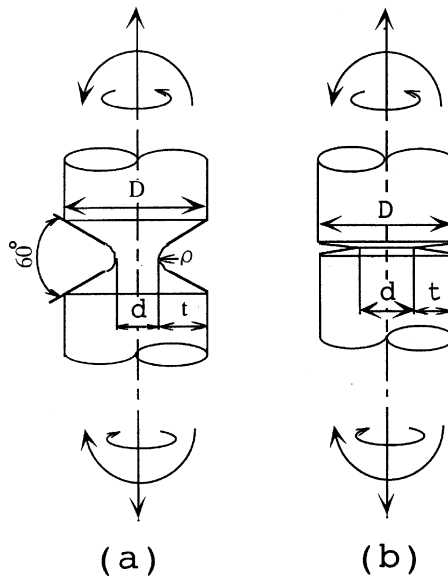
60° V-shaped notched bar under tension, bending, and torsion: (a) case of notch root radius, (b) case of crack.
